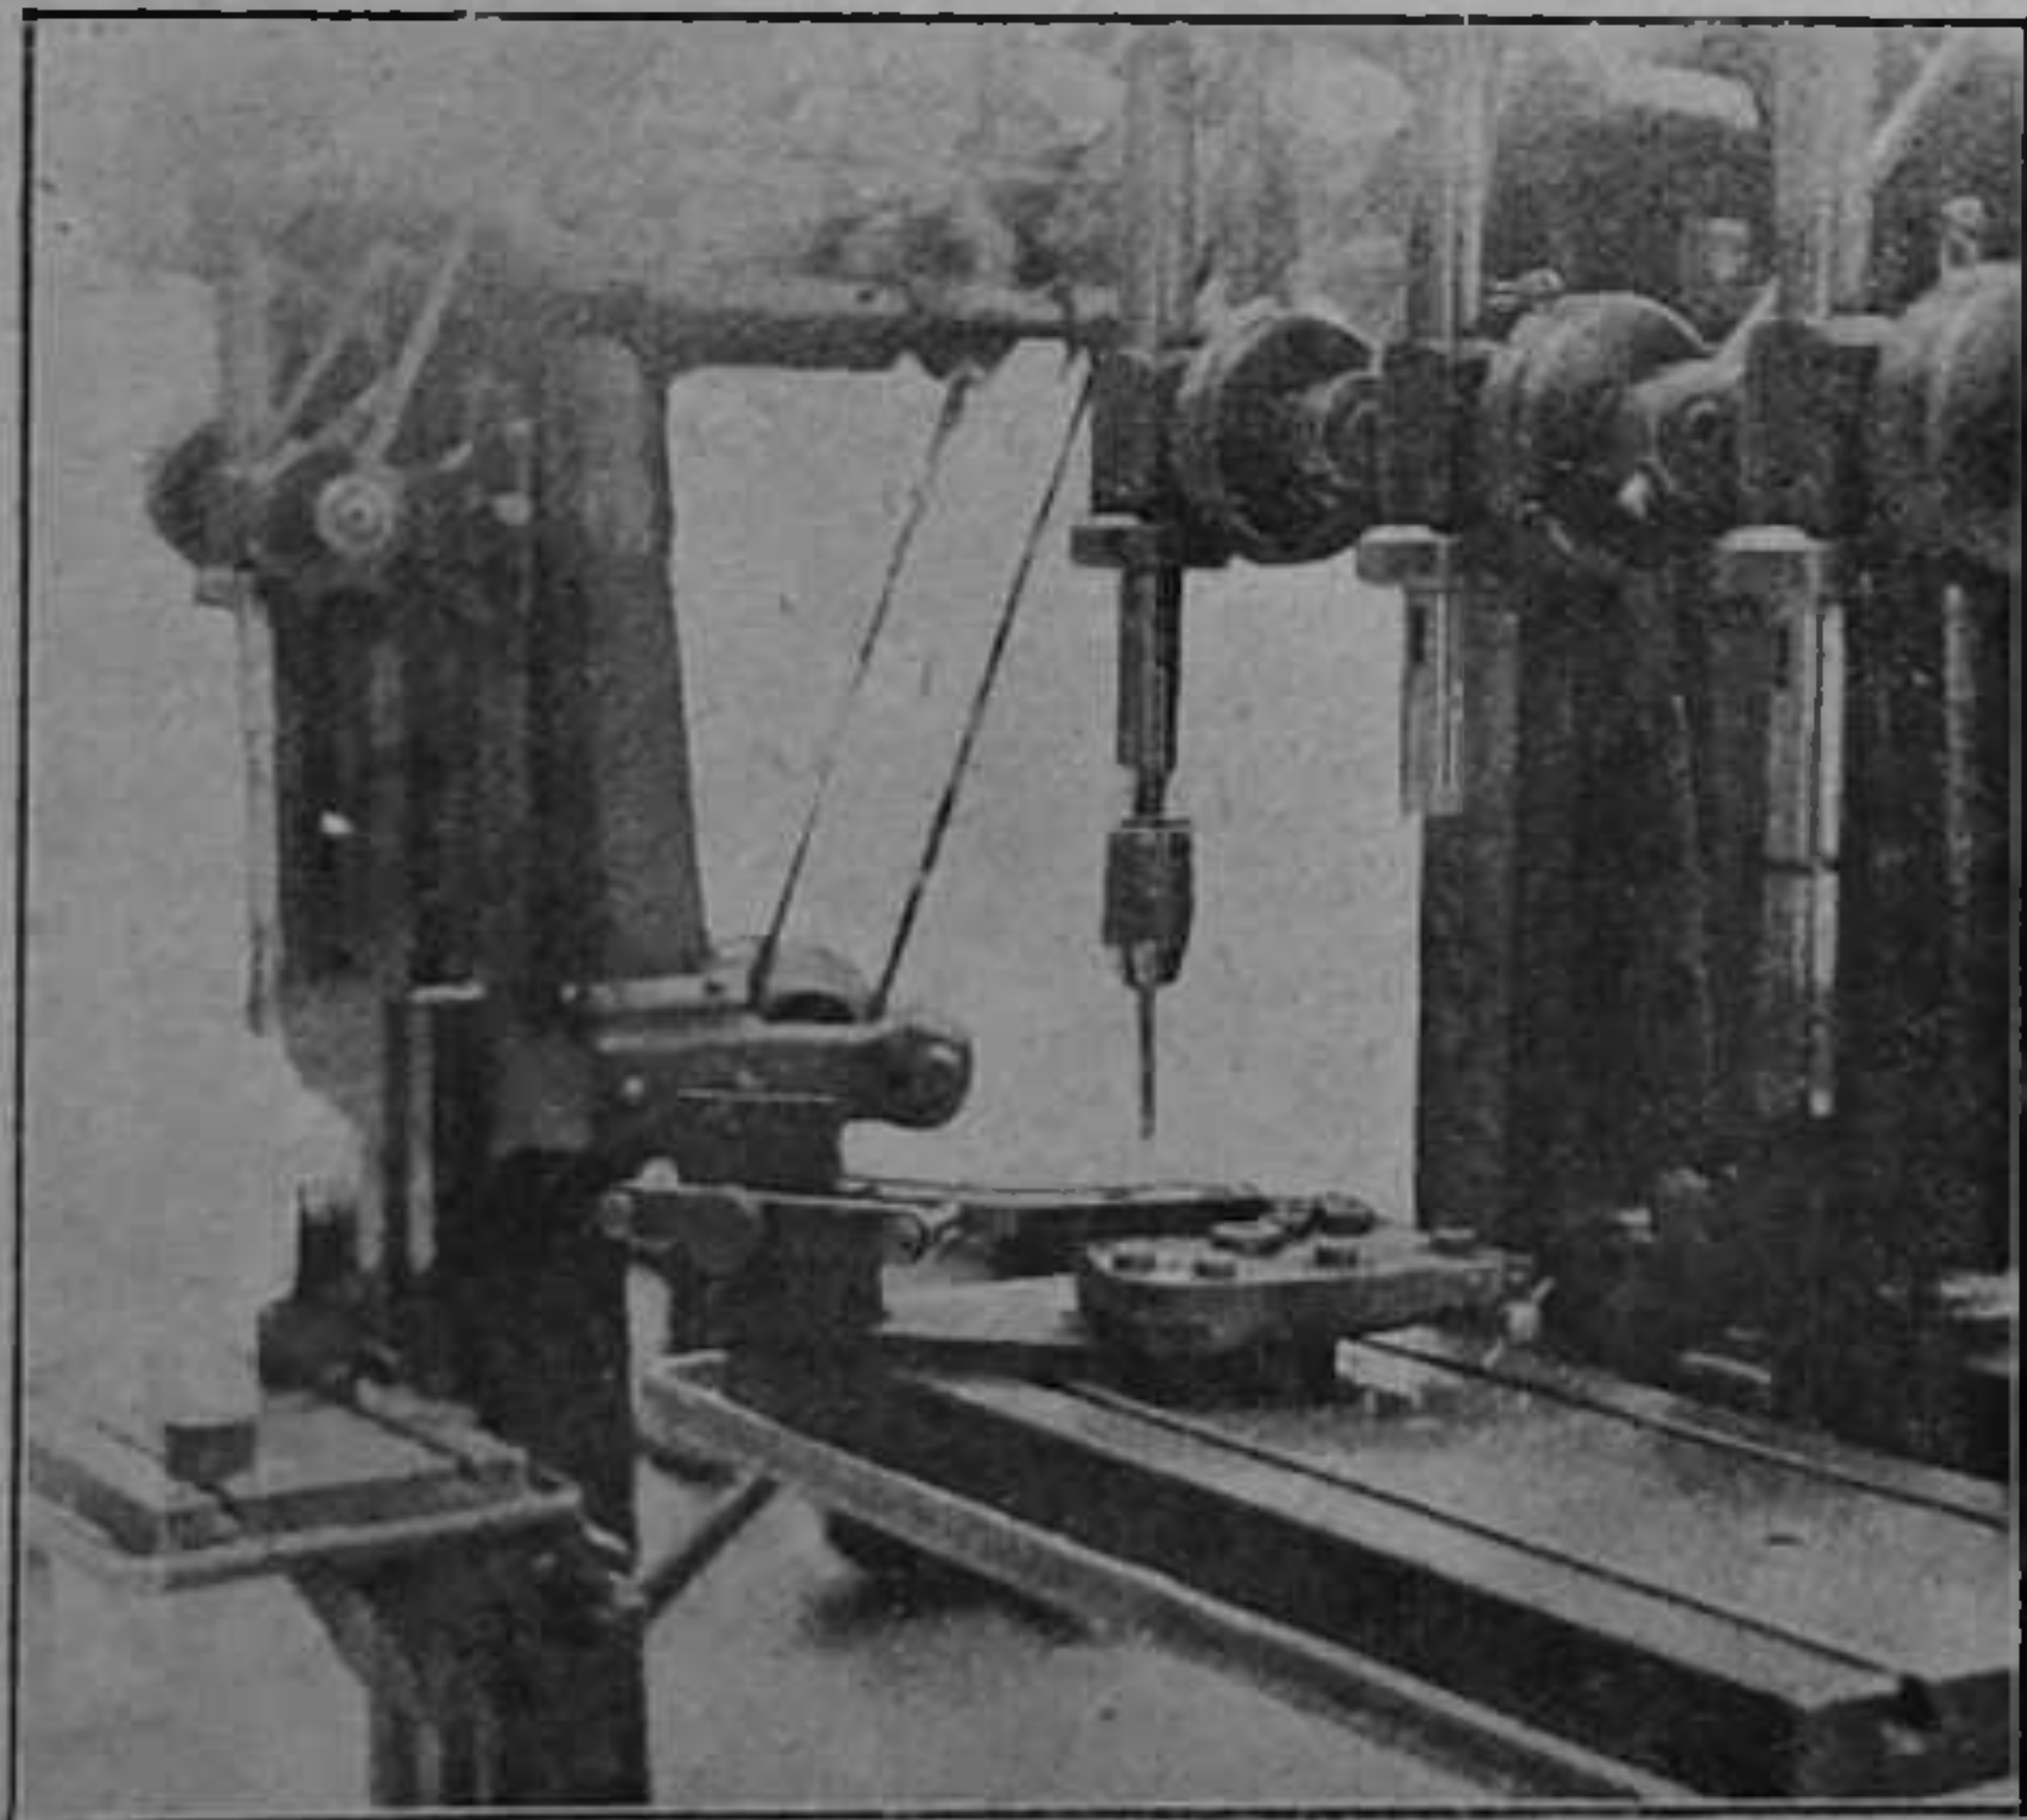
Drilling the bush holes in the cover. Note the jig through which the drill passes.
